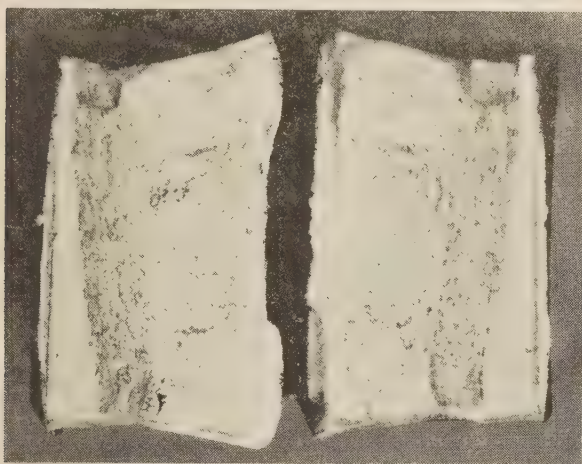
BOILER PLATE, MILLED AND CRACKED BY SUCCESSIVE IMPACTS
